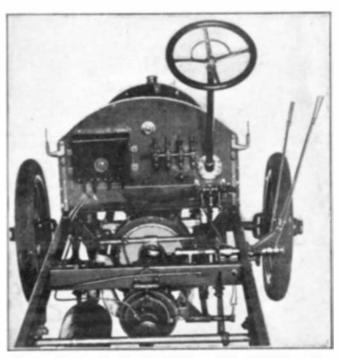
BACK OF DASH, SHOWING ENGINE FLYWHEEL AND UNIVERSAL JOINT OF PROPELLER SHAFT.
